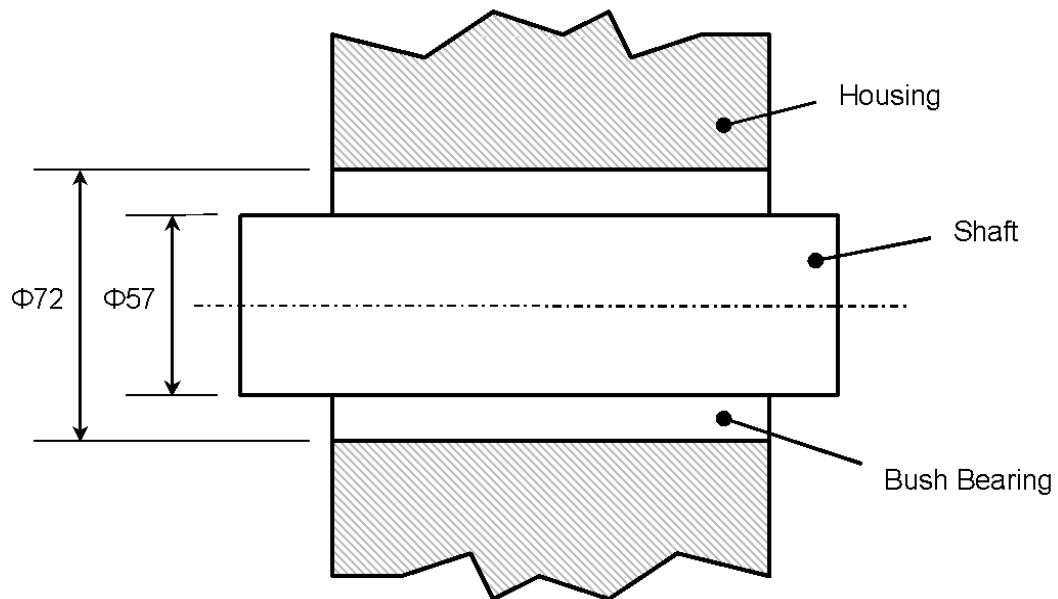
Cross-sectional view of a shaft, bush bearing and housing assembly
